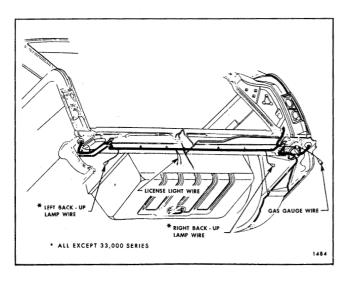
Rear Cross Bar Wiring - All "A" Bodies
